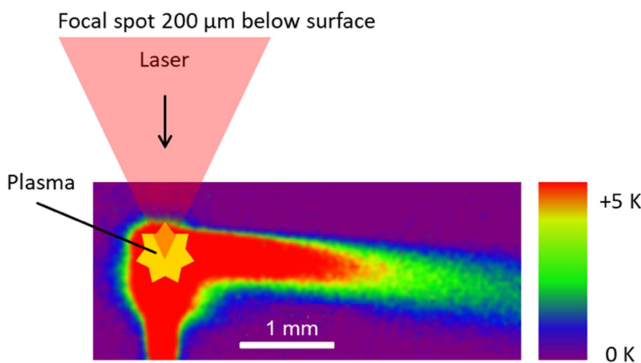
Thermographic image of the USP glass welding process in fused silica. See table 1 for experimental conditions.
